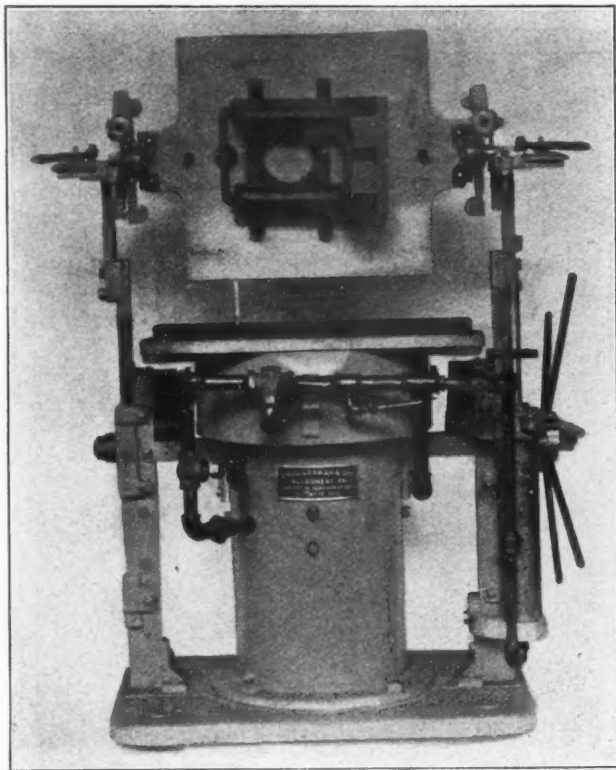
FRONT VIEW OF MACHINE WITH PATTERN PLATE IN VERTICAL POSITION.
